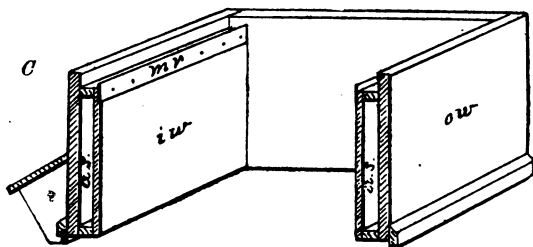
Sectional View of Body-box of Frame-Hive.
